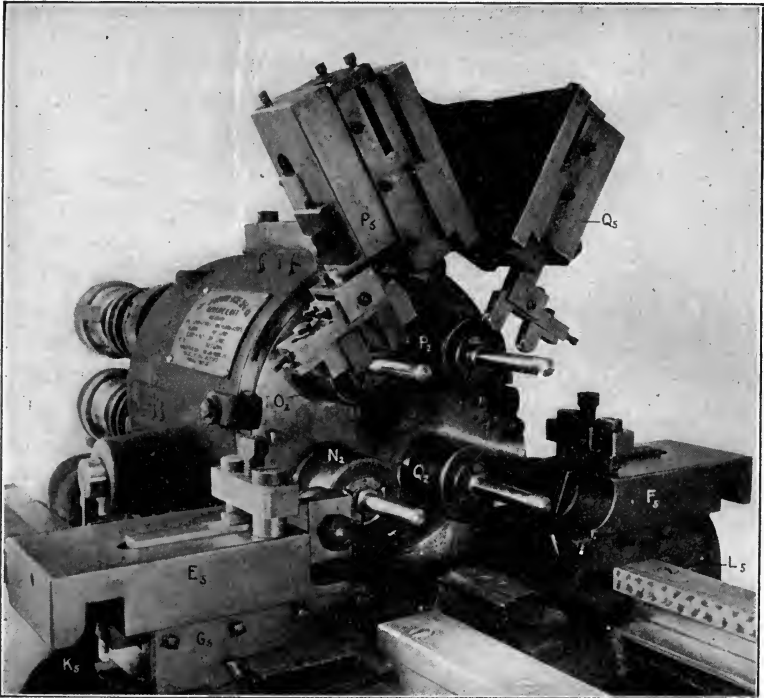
Main Tool-slide removed, showing Arrangement of the Cross-slides on the "Acme" Multiple-spindle Automatic Screw Machine
